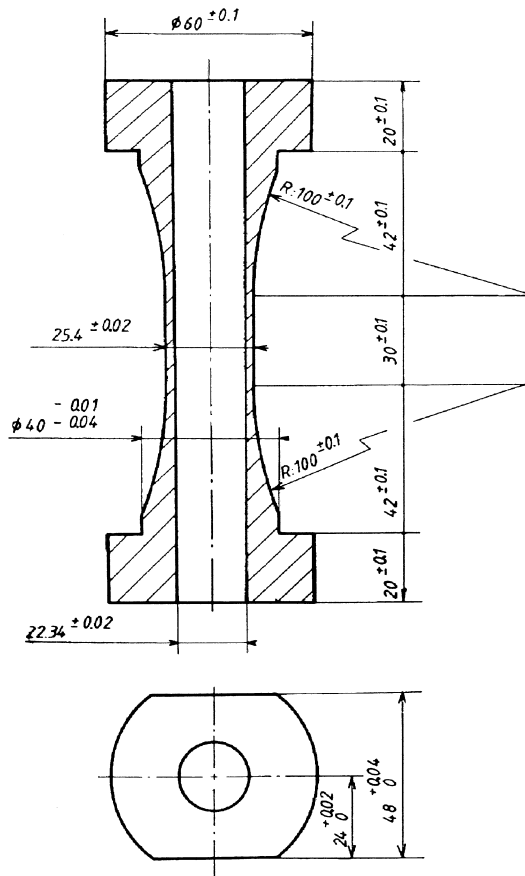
Geometry and sizes of the tension–torsion specimen (in mm).
